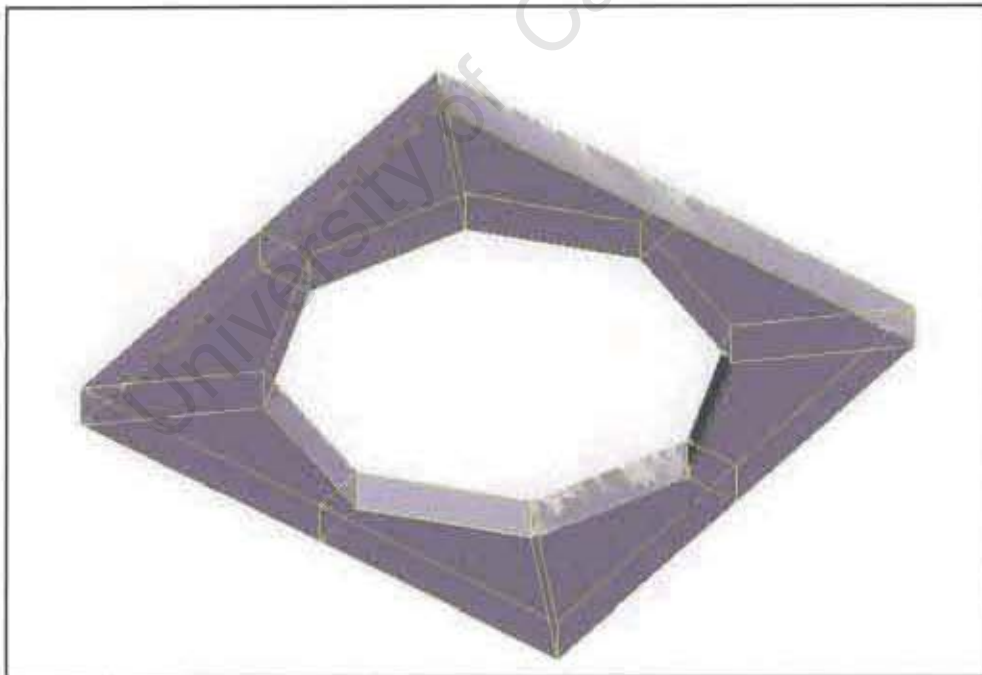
A plate doubler made up of 6 brick elements, used at the top or bottom of a 6 sided plate element pillar (pillar not shown), in order to better distribute the forces into the adjoining structure.
